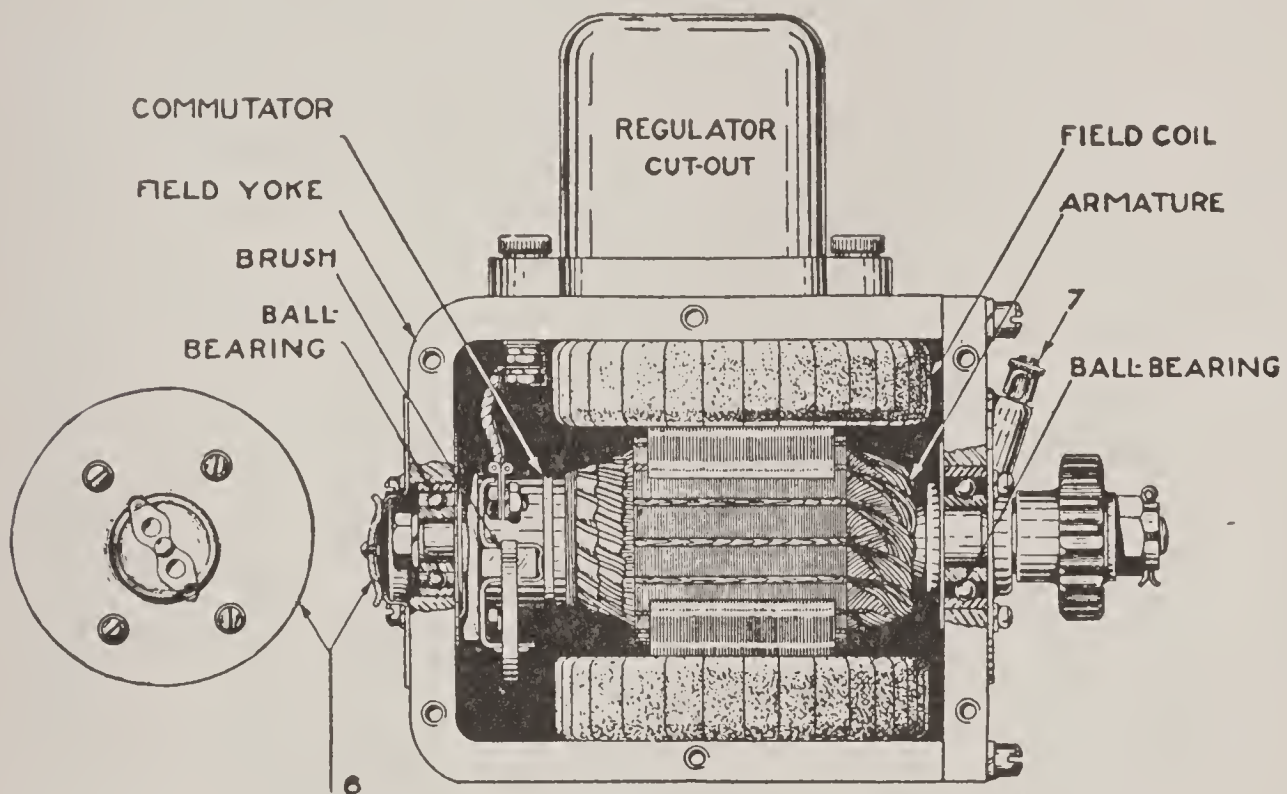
Section of Gray & Davis Generator for Silent-Chain Drive
